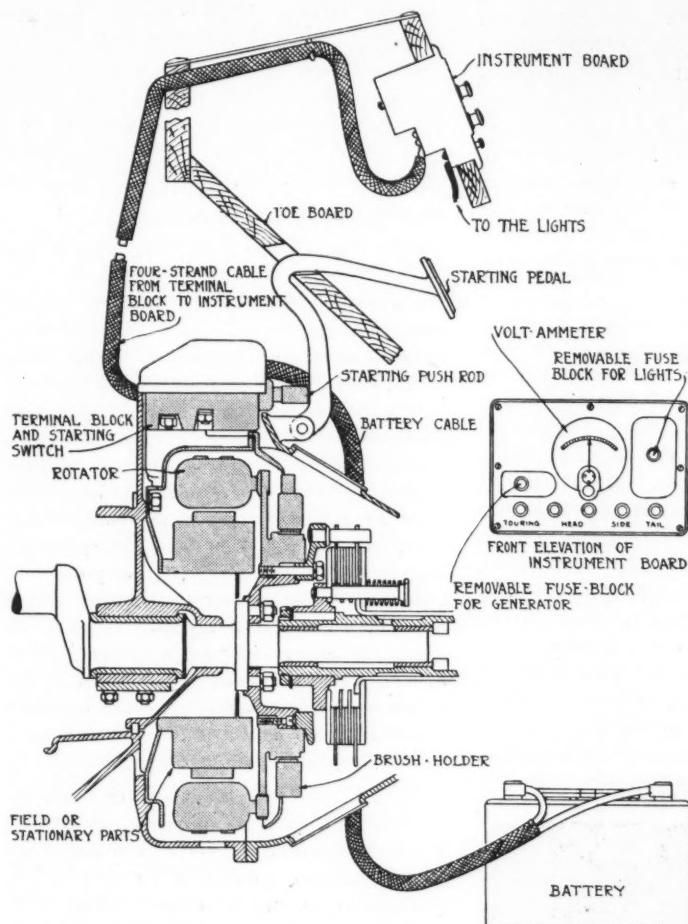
Section through assembled U. S. L. system. The parts shown in white are furnished by the maker of the car; those in shaded areas, by the U. S. L. company
